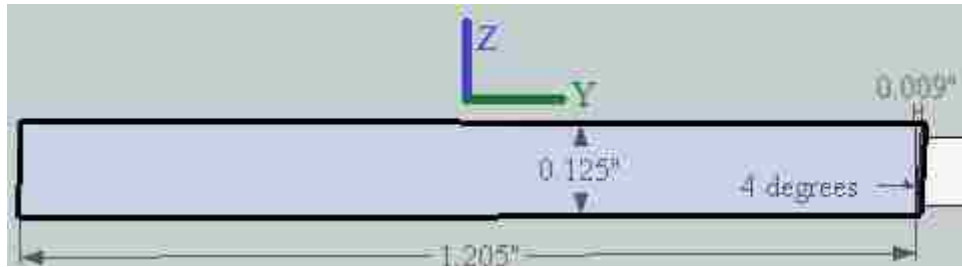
Cross sectional view of the 10x10 cm² middle trimmer aluminum plate illustrating the thickness and lateral in-plane and cross-plane dimensions of the plate. The middle trimmer is square, such that all non-hole dimensions are equal in the in-plane and cross-plane dimensions.
